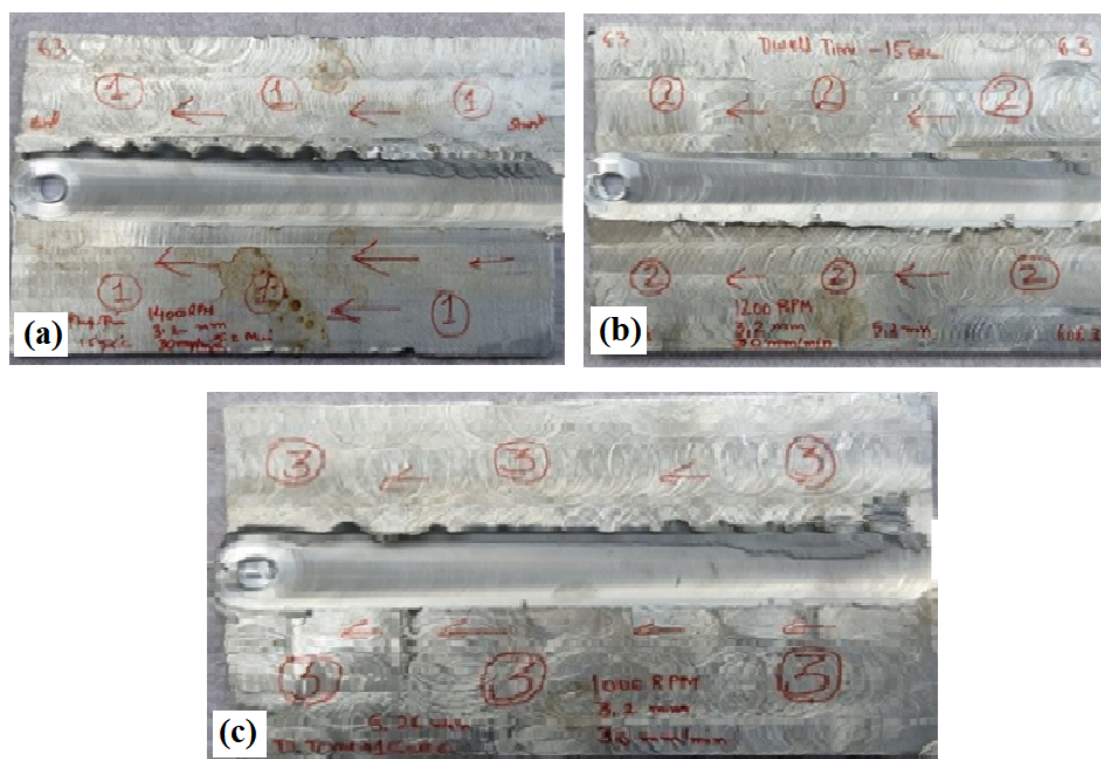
Welded specimen of AA6063 during friction-stir welding
